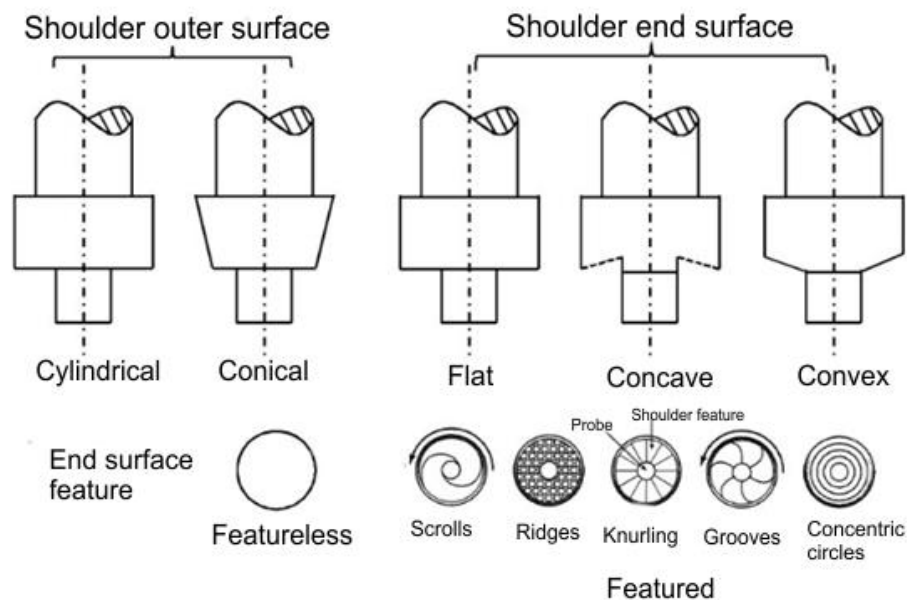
FSW tool and tool-related welding parameters
